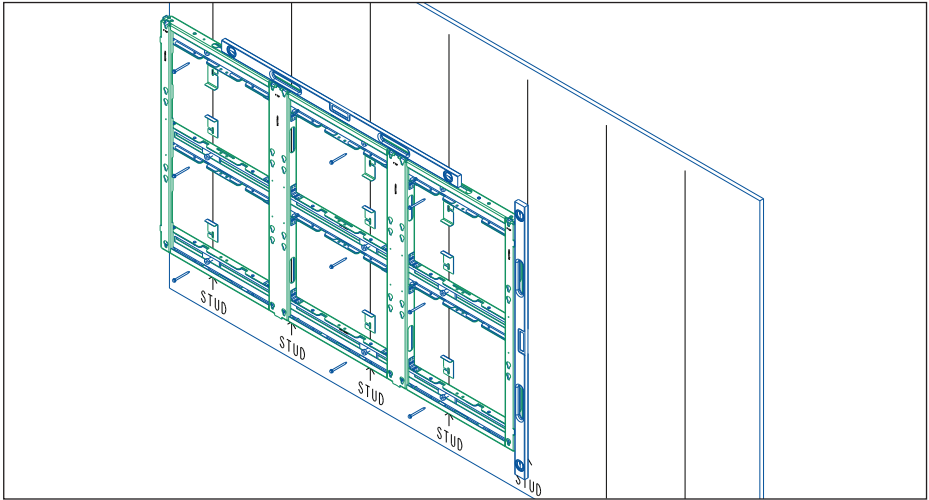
Install TEK Screws in Remaining Bolt Assemblies
